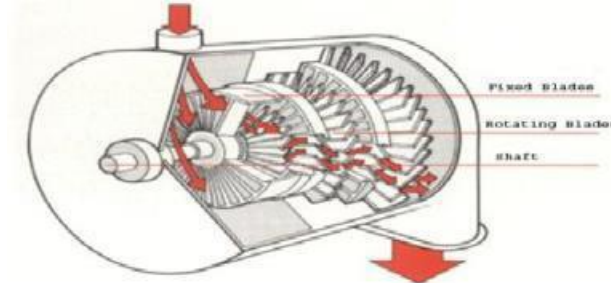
Turbine Blade Coupled to Centrifugal Compressor
